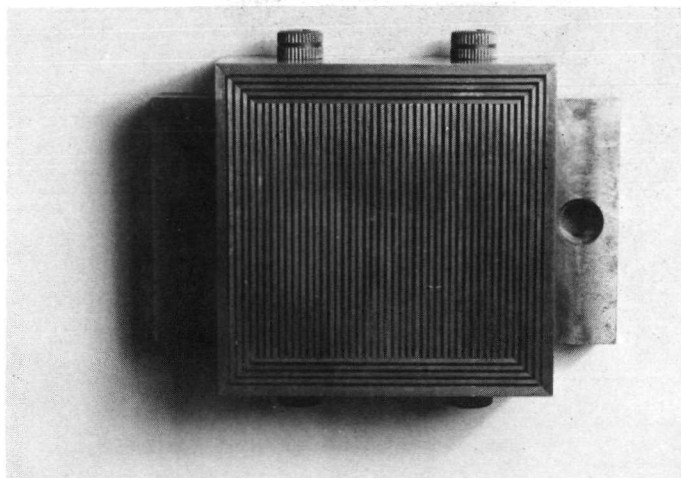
TELLURIUM-COPPER EDM ELECTRODE EMPLOYED TO MACHINE BURST-TEST FINNED SHELLS
